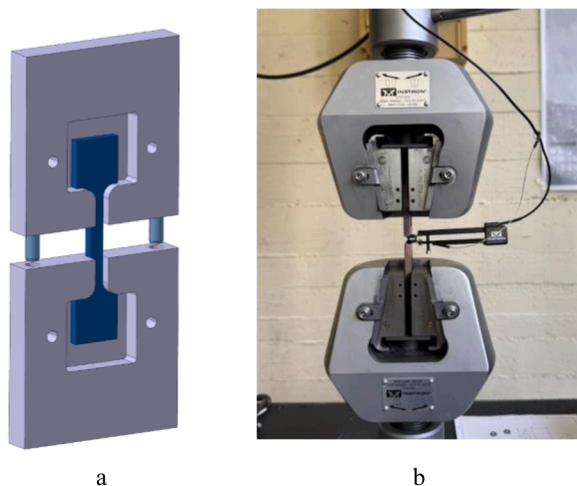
Fixture (a) for tensile tests on miniaturised specimens and test setup (b).
